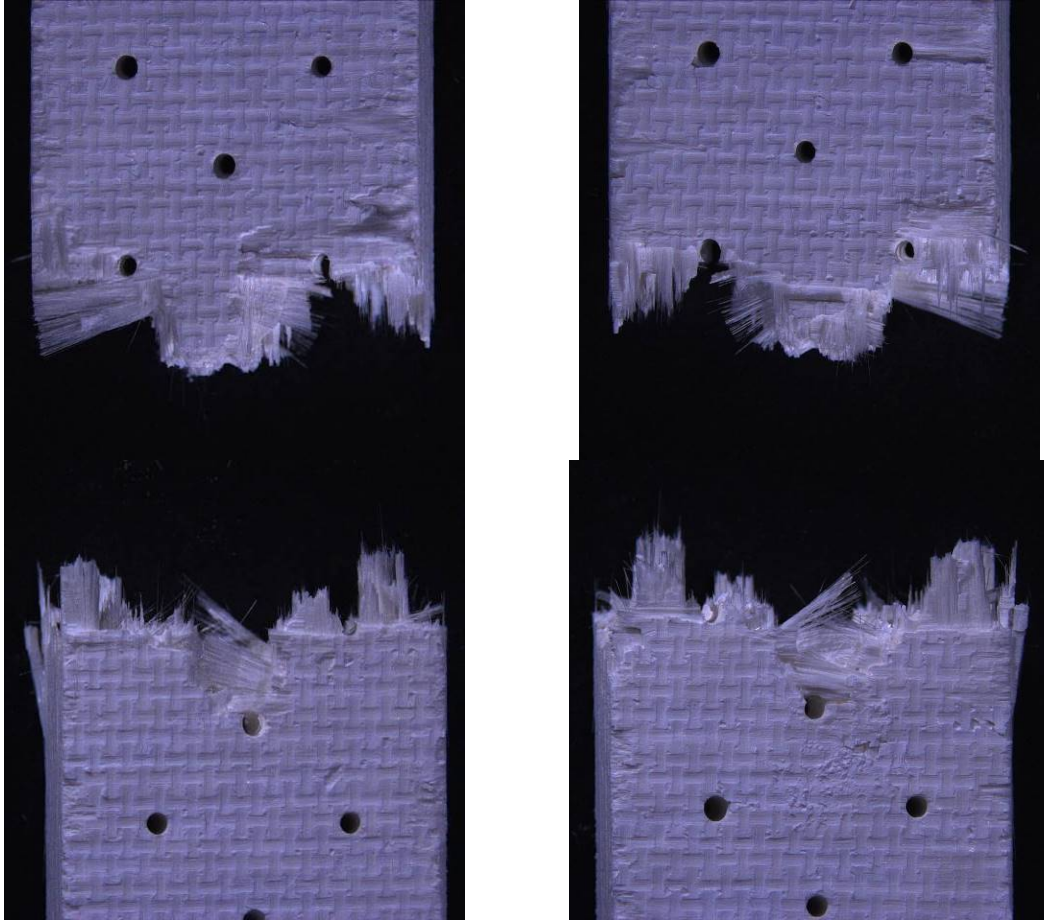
Top and bottom fracture surfaces of specimen #12, tested in tension to failure following 100 h creep at 46 MPa at 1200°C in steam
